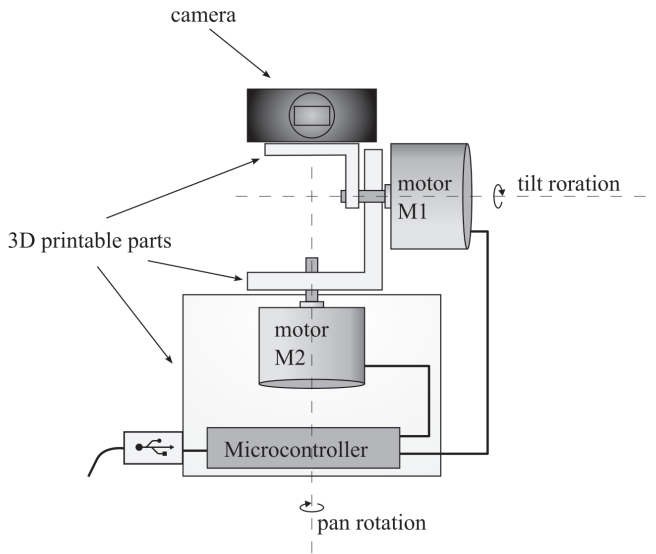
Device mechanical design. A front view of the device, showing motor placement and rotation axes, with M1 representing the tilt axis and M2 the pan axis
